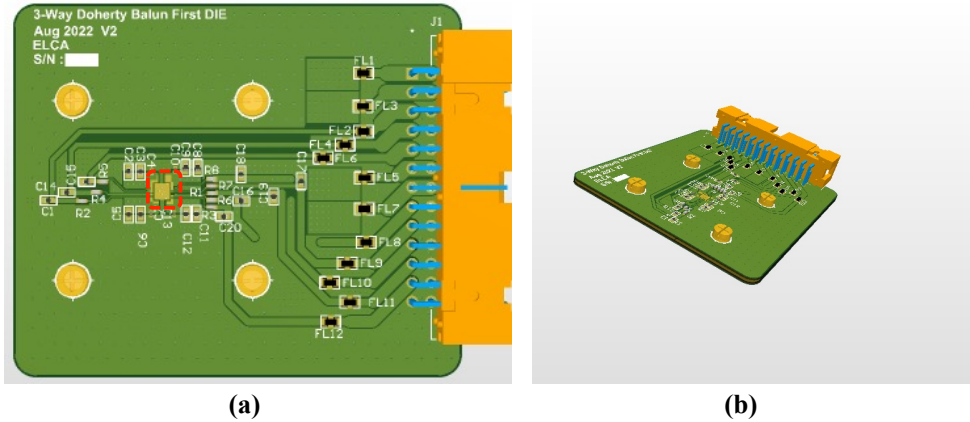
(a) Top view, and (b) isometric view of the daughter board PCB for the balun first 3-way Doherty PA.
